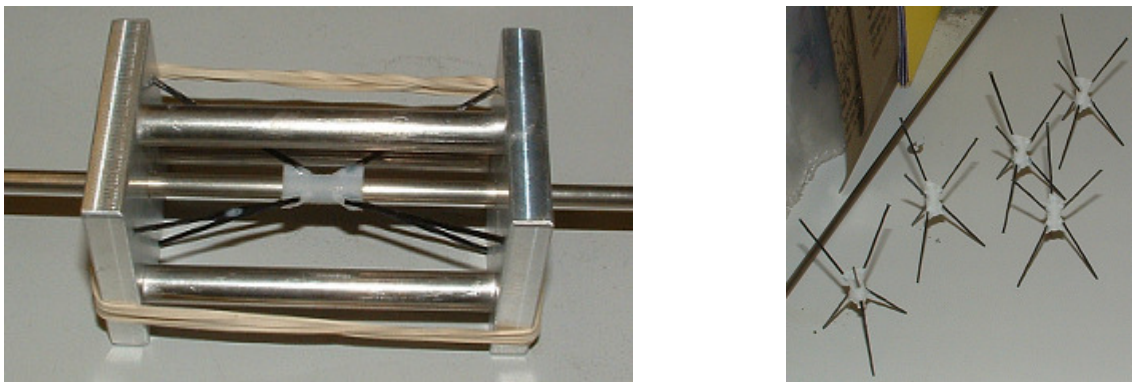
Jig for the fabrication of the carbon fibre struts.
